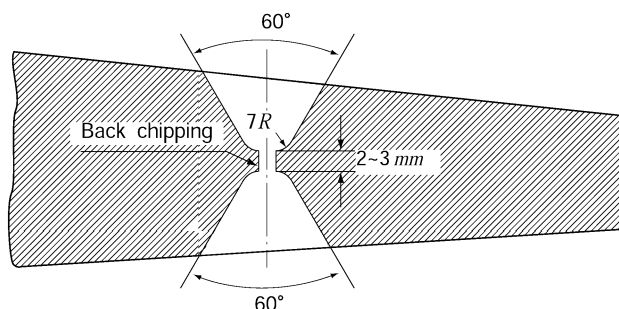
Edge Preparation for Repair Welding of Blade Edge
